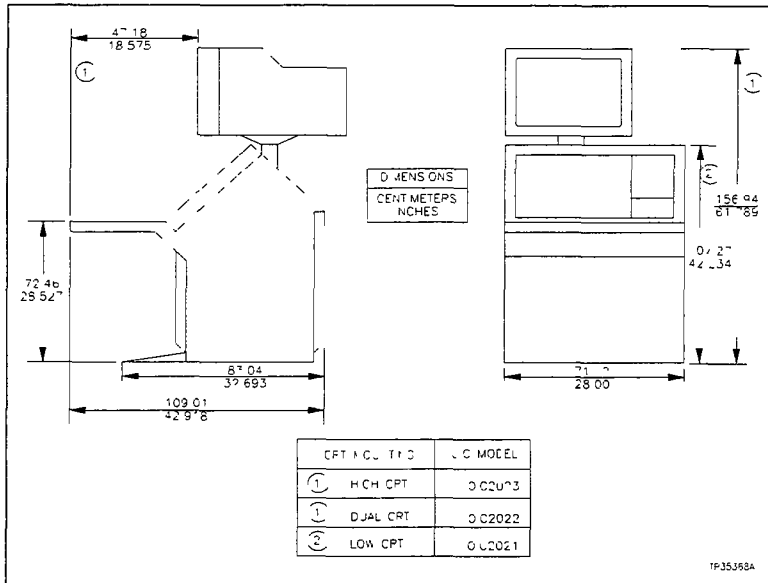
11 IIOIC2021/2/3 Cabinet Dimensions
